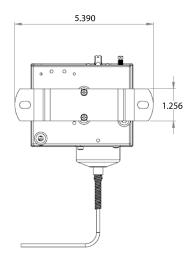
Optional mounting bracket FLS MTG BKT dimensions, in.
